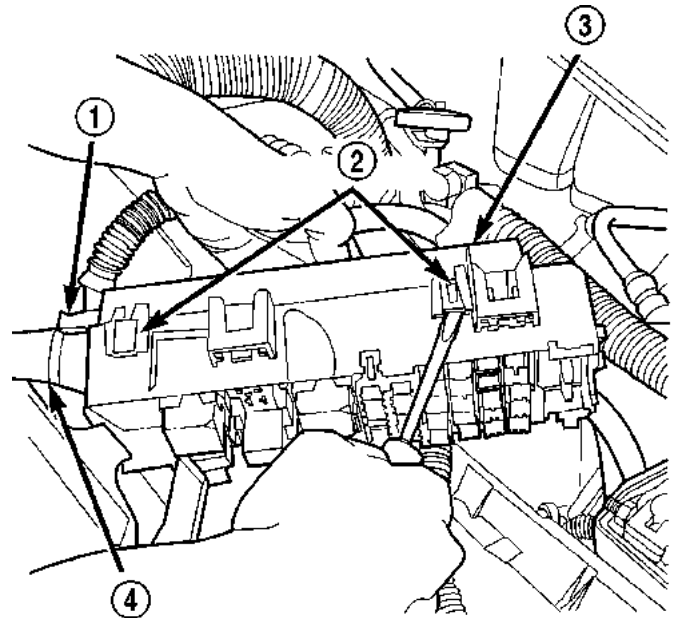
PDC Housing Lower Cover Remove/Install - Typical
